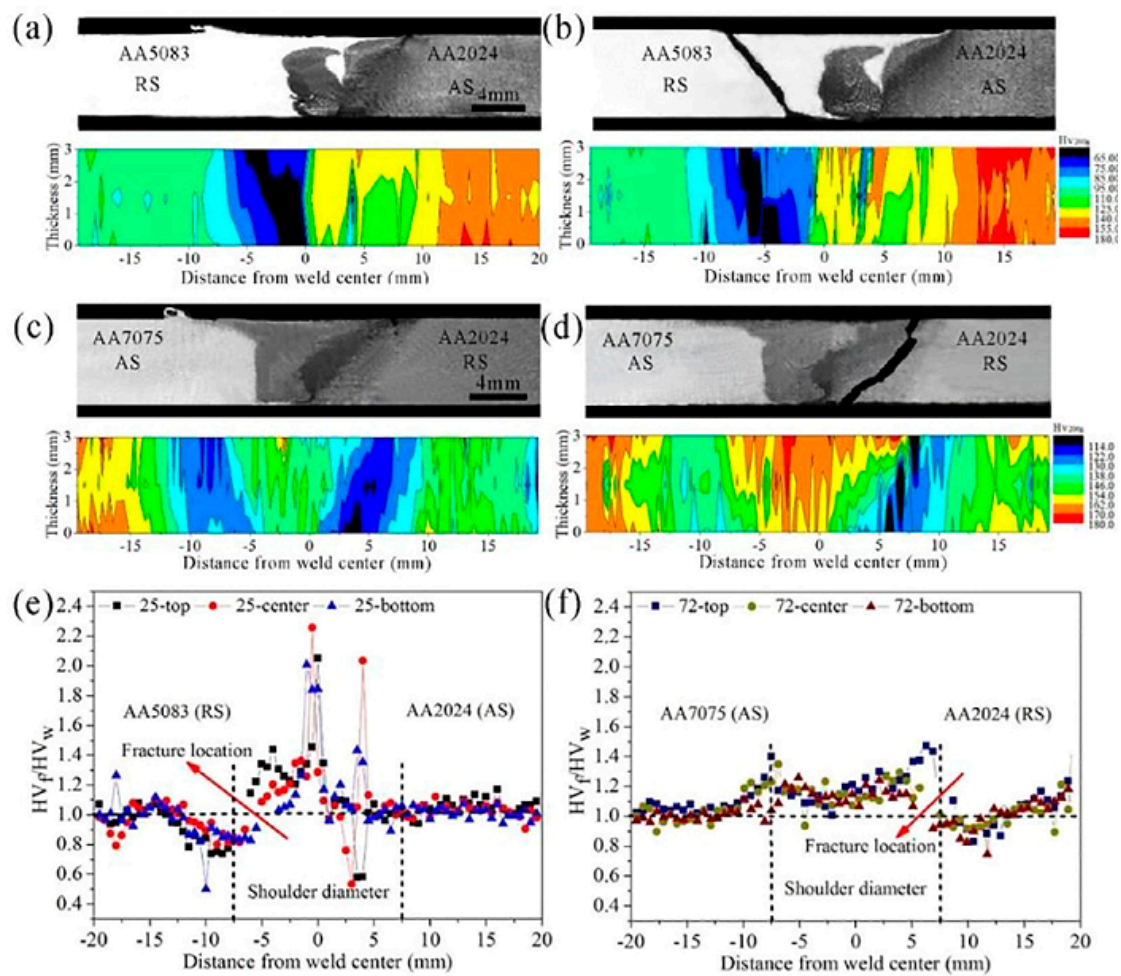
Cross-sectional macrostructures and hardness distributions of the FSWed dissimilar joints: (a) 25-joint before fracture, (b) 25-joint after fracture, (c) 72-joint before fracture, (d) 72-joint after fracture; hardening level across the FSWed joints: (e) 25-joint and (f) 72-joint, reproduced from [13], with permission from Elsevier, 2018. Note: 25-joint means AA2024-AA5083 and 72-joint means AA7075-AA2024 joint.
